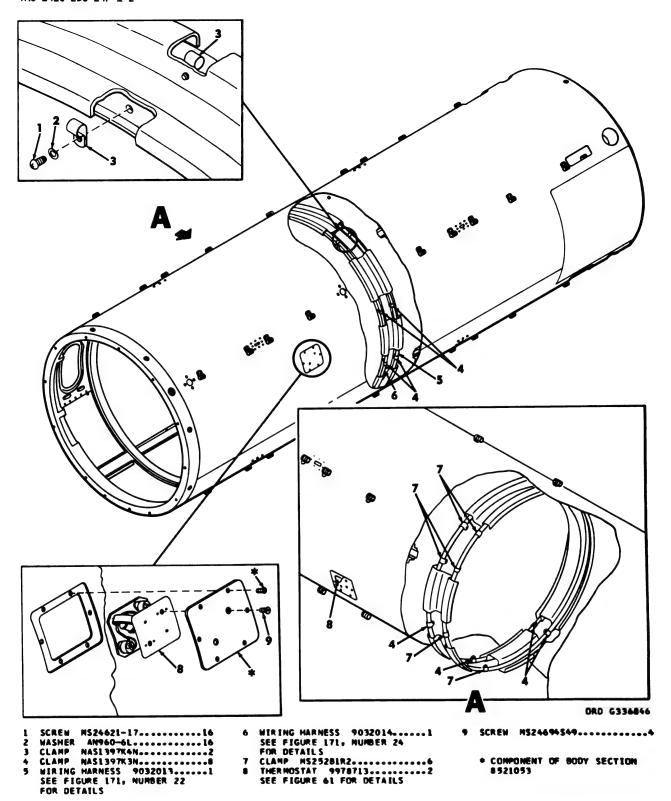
EQUIPMENT INSTALLATION, ENGINE SECTION /9028467/
